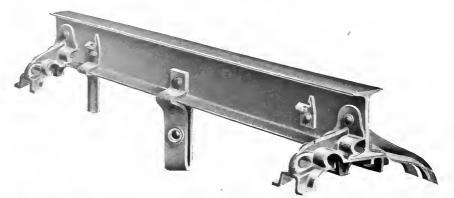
Vanderbilt I-Beam Brake Beam with Wheel Guard and Chain Clip.
